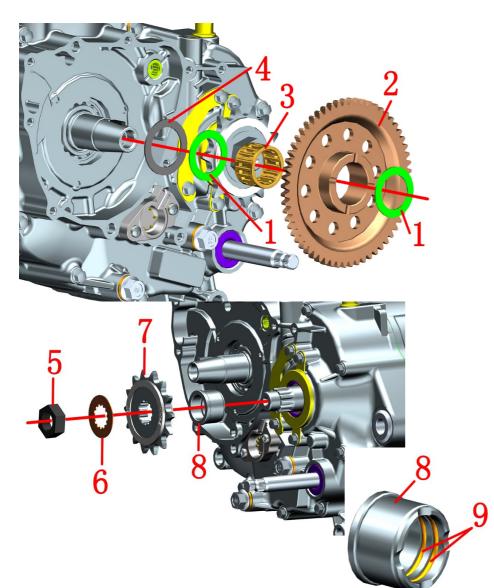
LF	EFT CRANKCASE	Disassemble the large starting gear and the output	CHK	(0)
